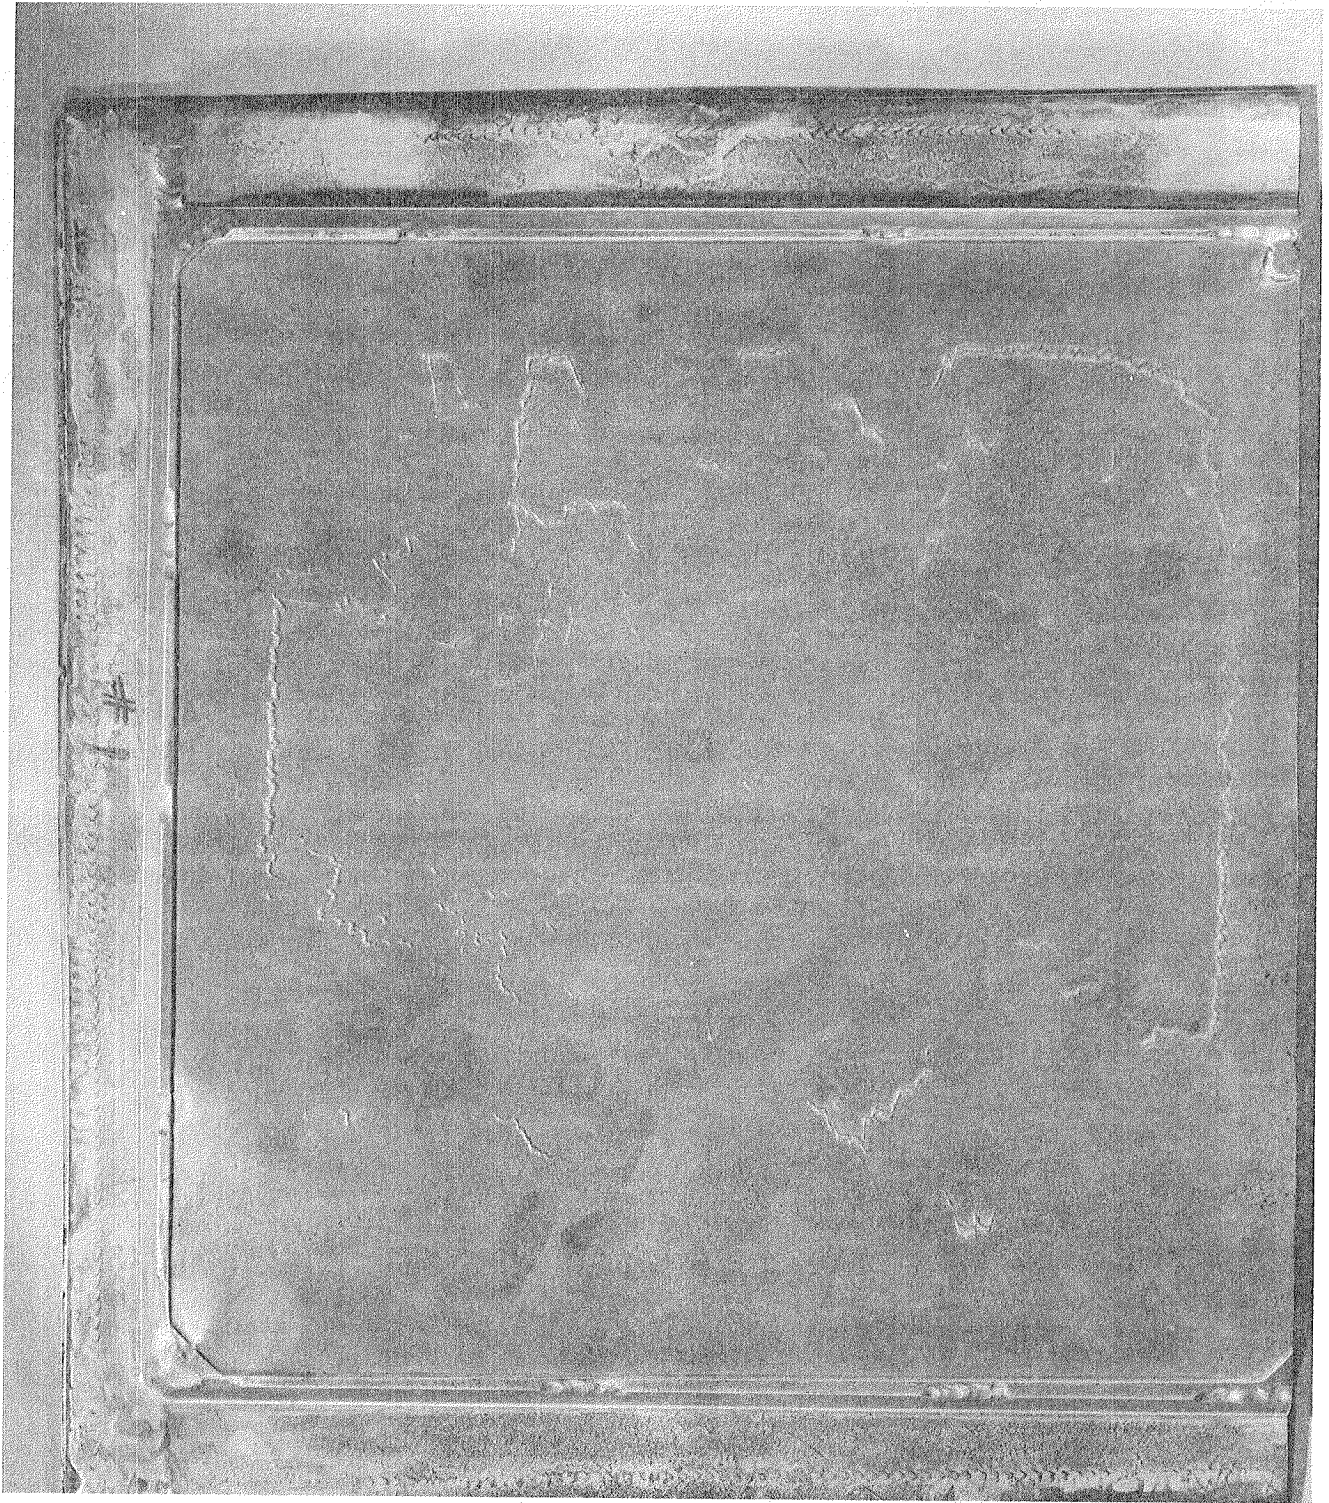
PANEL NO. 1 BOTTOM FACE SHEET
